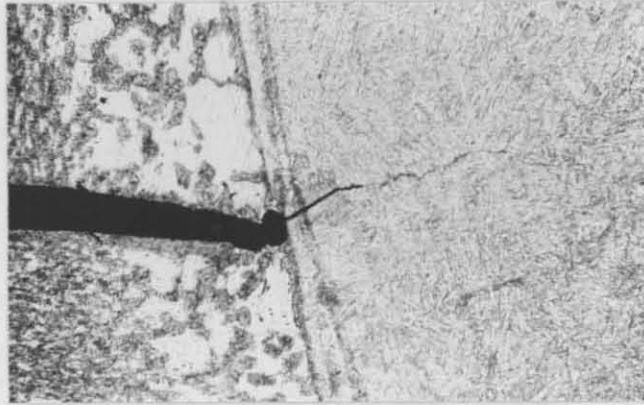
Weld metal crack in the fillet weld of a FLNFT test specimen welded with an E3CR12 filler metal. The crack initiated after some crack tip blunting of the through-thickness crack (35X).
